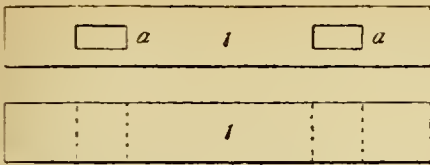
BACK PART OF FRAME FOR TREADLE.
